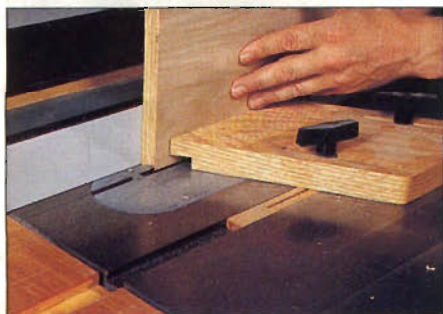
Photo I: For mitered edging, bevel-cut a centered 45° V-groove into the edge of the panel to accept a square hardwood blank.
